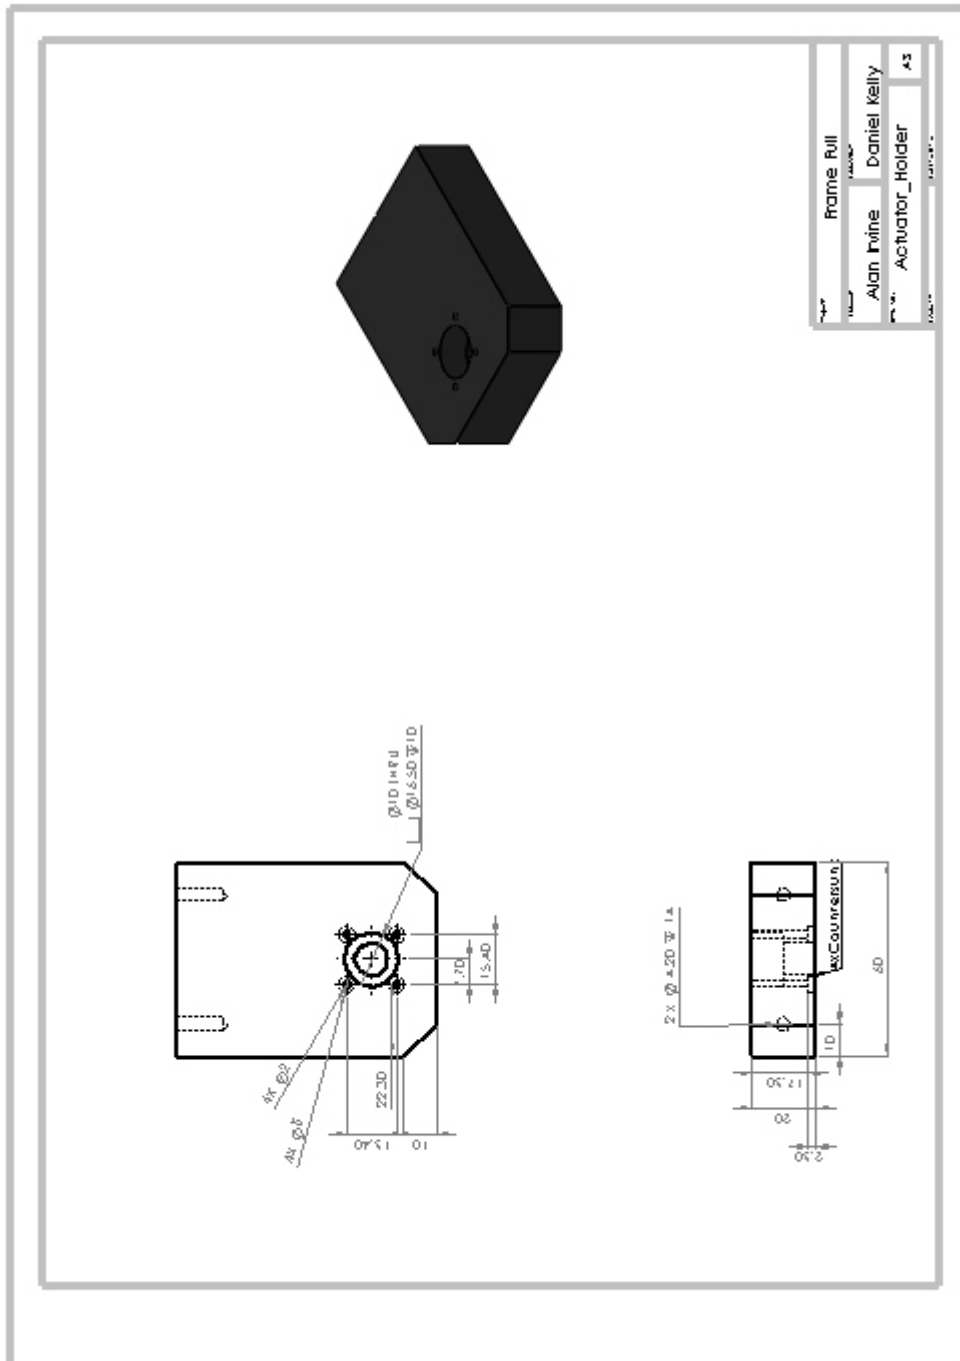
Technical drawings for the actuator holding section of the rig frame.
